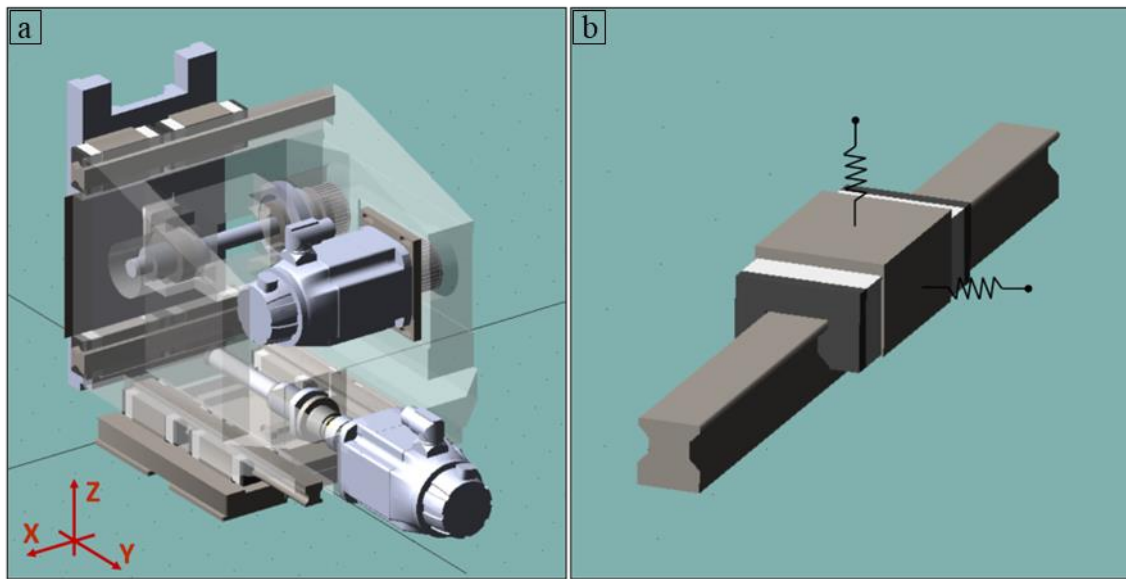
(a) Mechanical components of the X and Y axes; (b) schematic of the bushings in linear roller blocks.
